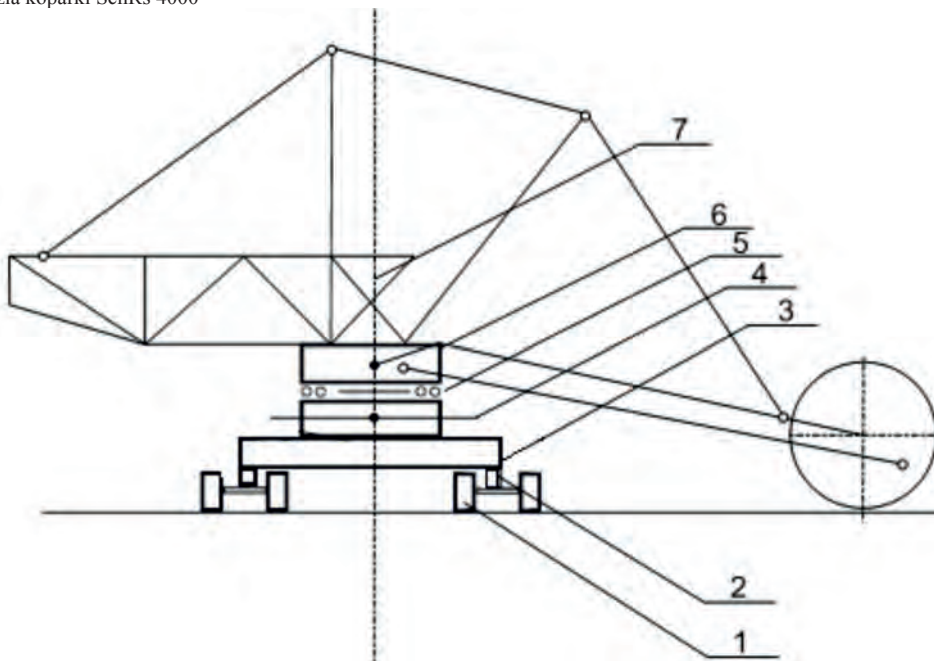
Schematic diagram of the position of the chassis and superstructure bearing assemblies in the BWE
